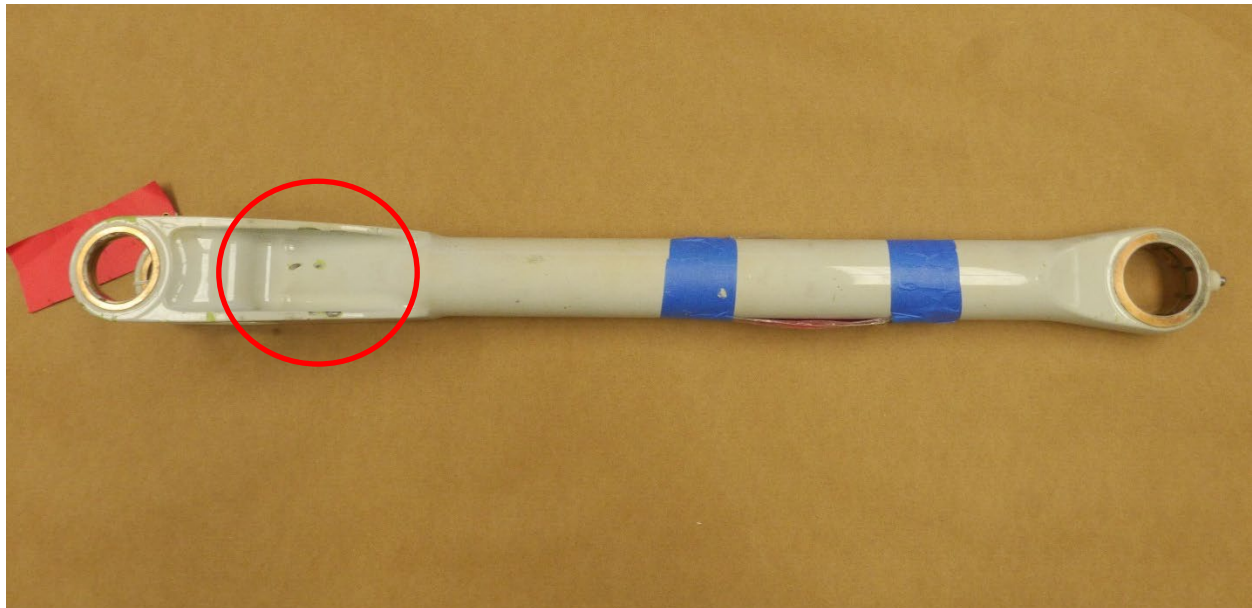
#6 brake rod as received at the Boeing Equipment Quality Analysis Laboratory. The red circle highlights the damage consistent with contact with the landing gear upstop. Courtesy of Boeing.
